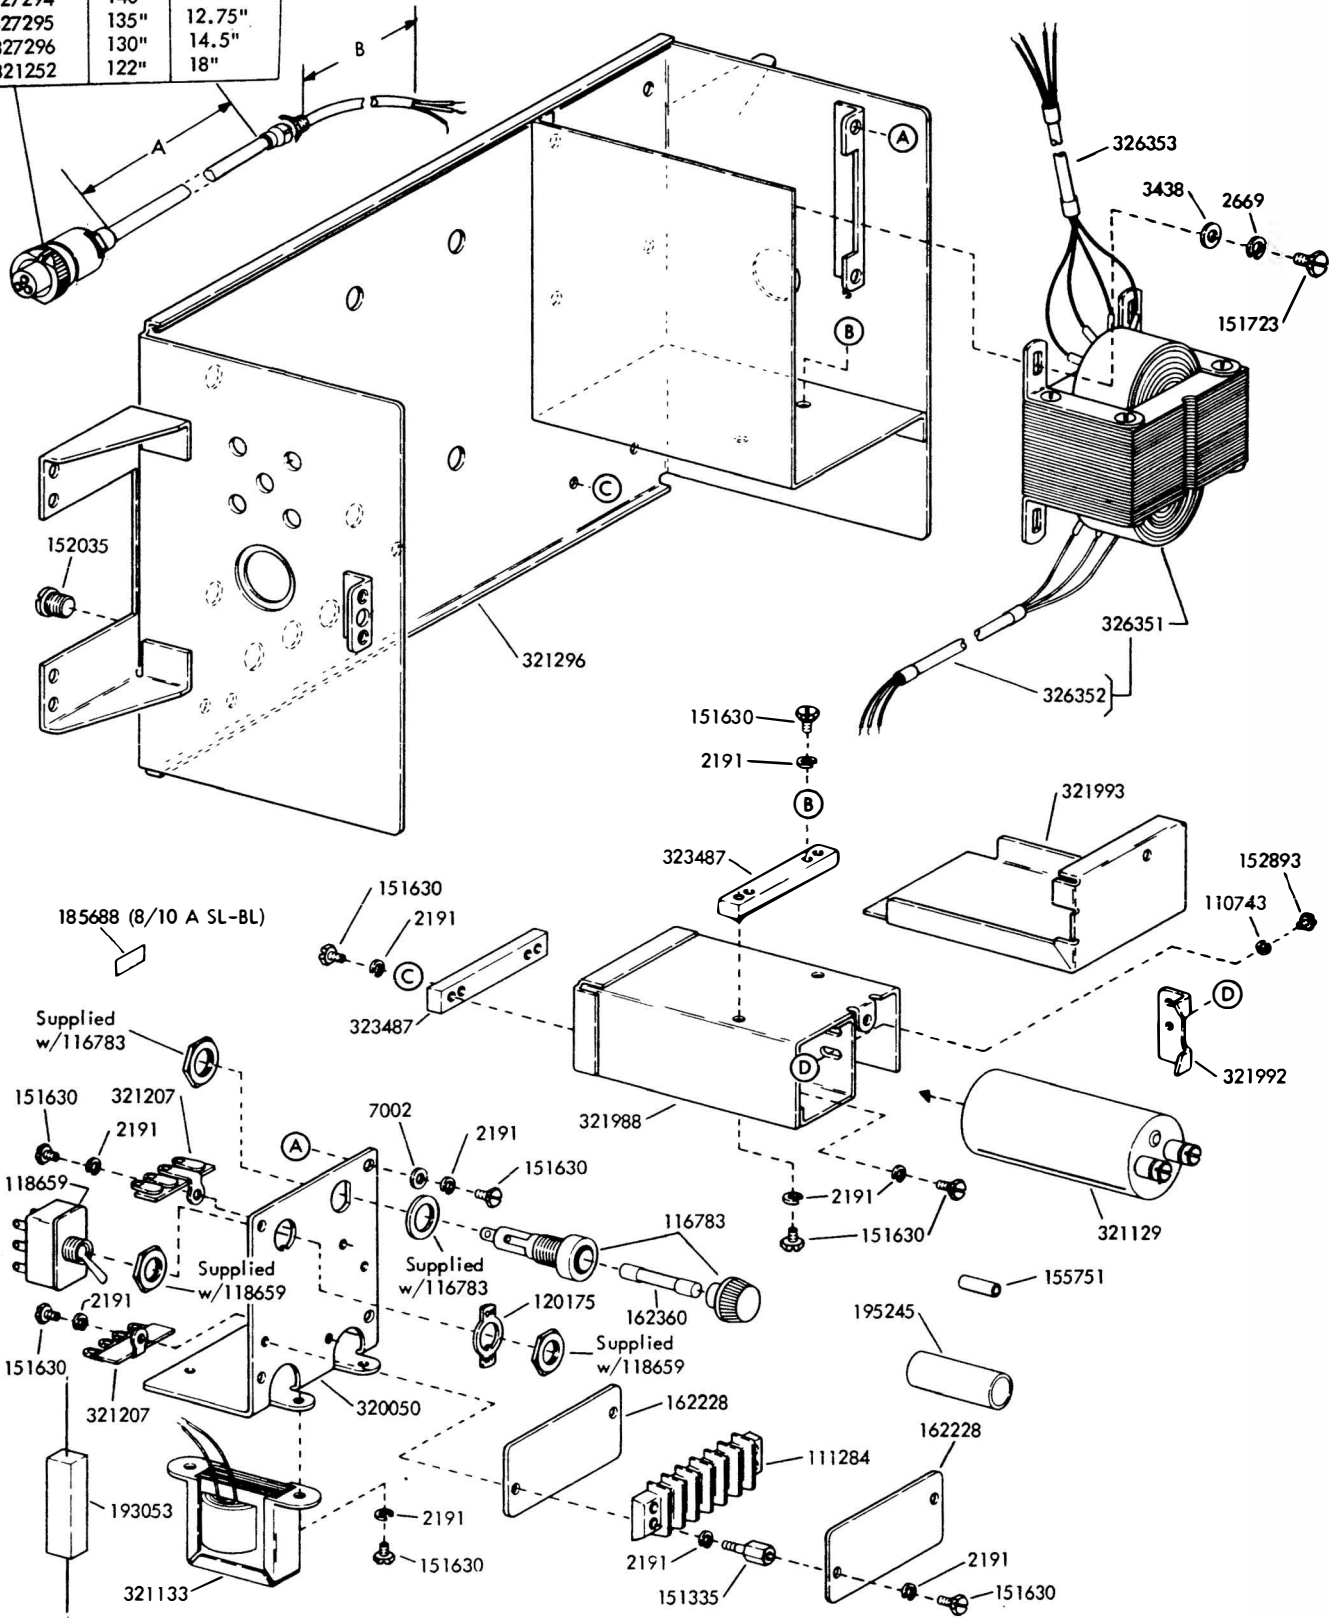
323821 ELECTRICAL SERVICE ASSEMBLY
